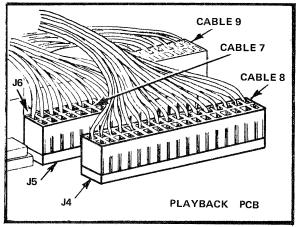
Connect Cable #8 to J4 on the Playback Board.
